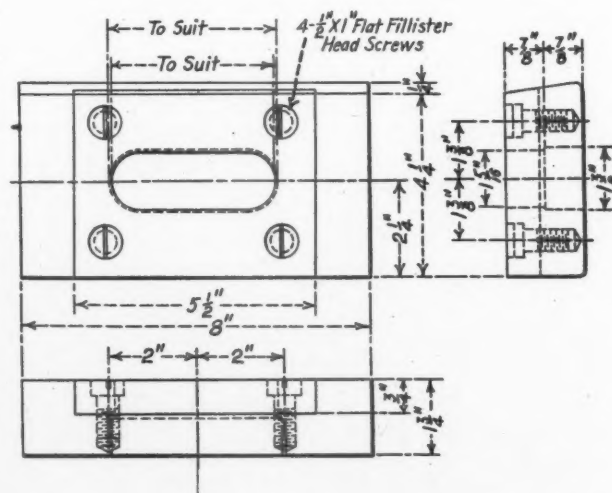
High-speed steel tips and inserts in dies for punching holes in spring plates
